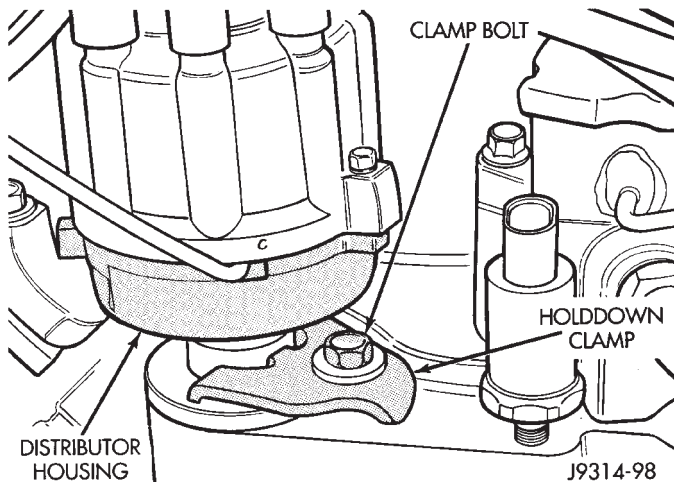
Distributor Holddown Clamp—5.2L Engine
